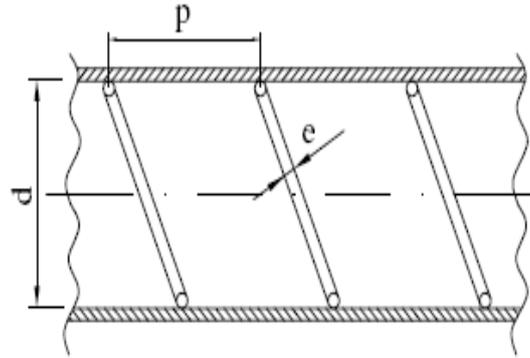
Sketch of a coil wire fitted inside a smooth tube
